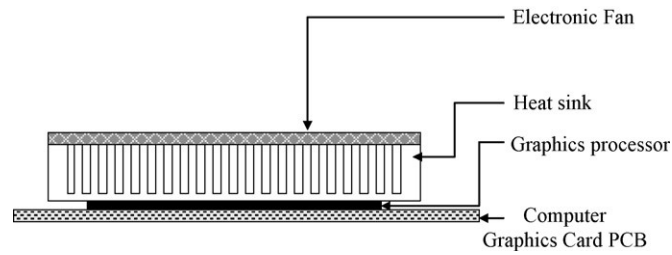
Schematic diagram of the standard heat sink and electronic fan assembly mounted onto the graphics processor.
